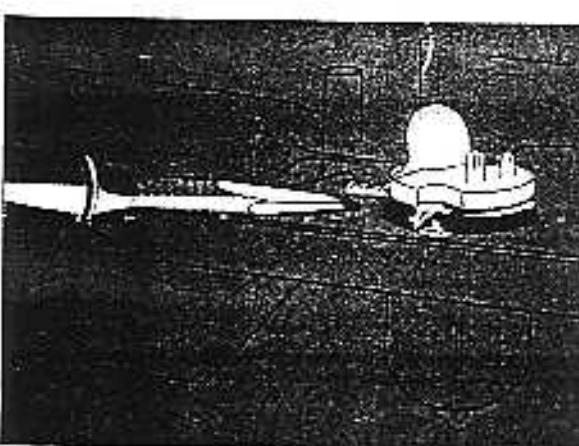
Soldering to a terminal. Note the slight fillet of solder exaggerated for clarity--formed around the wire.
